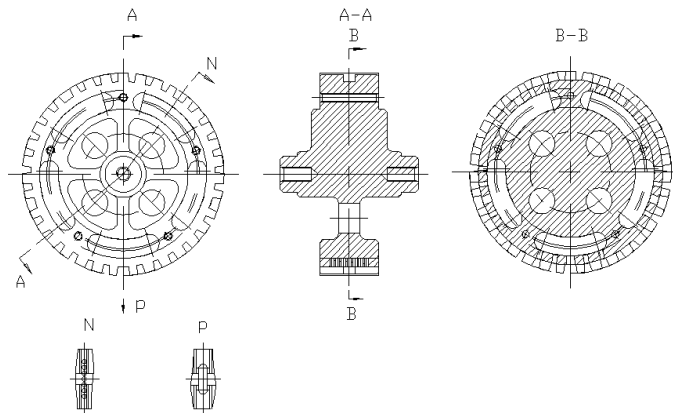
Design sketch of driven pulley parts of the improved pack model conveyer belt
